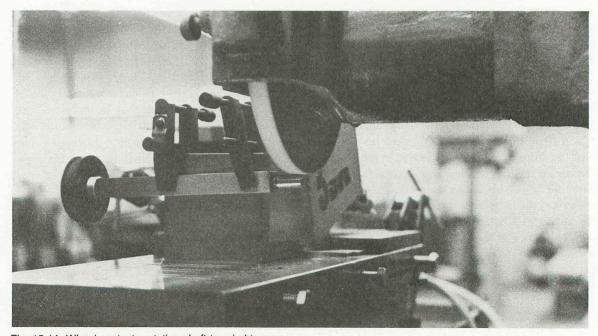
Wheel contacts rotating shaft to grind taper.
